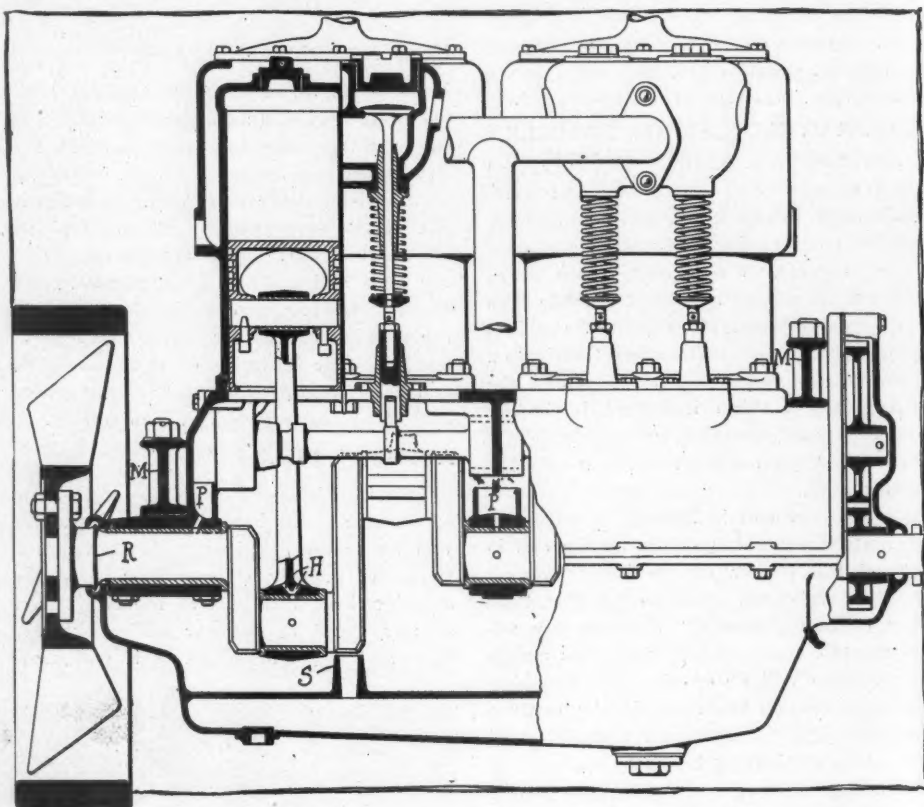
VERTICAL SIDE SECTION OF MOON 1911 MOTOR
